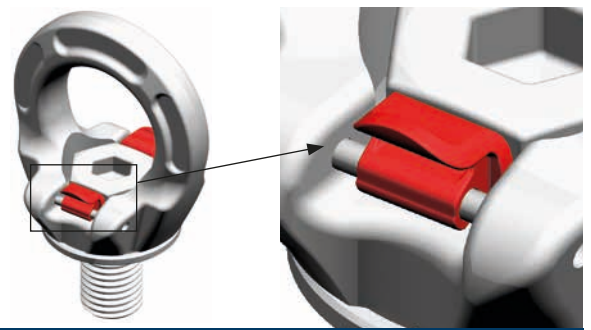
Position A – both latches are touching the screw. Only permitted during mounting and demounting.
